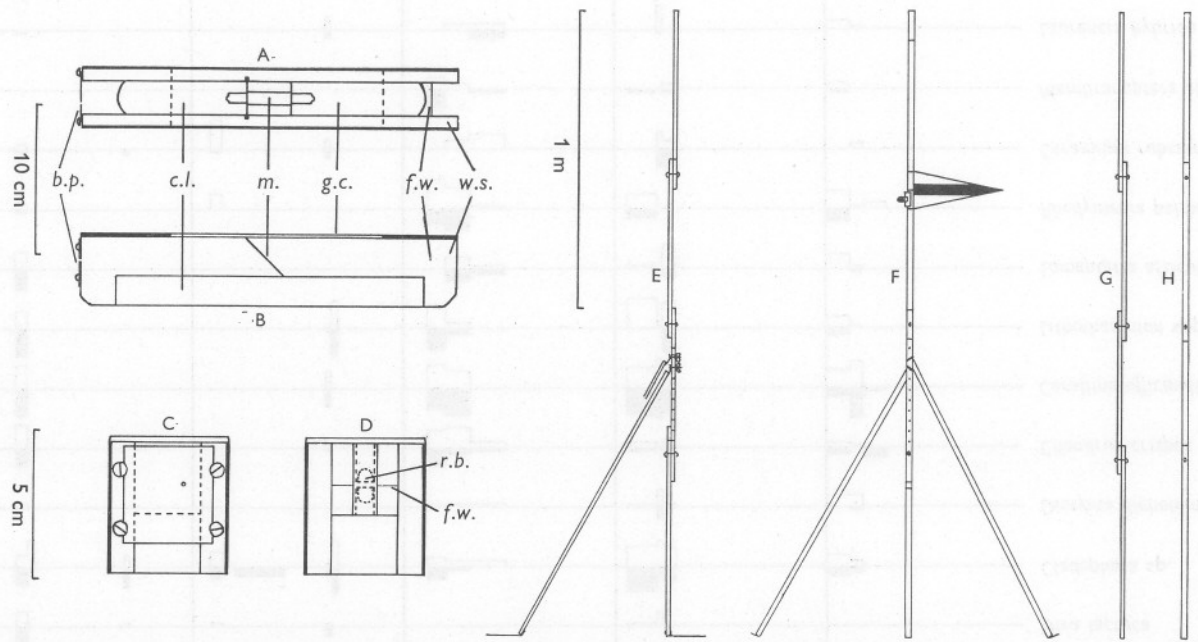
Diagrams of the sighting level (A-D), fixed staff (E and F) and movable staff (G and H). A, top view of level; B, side view; C, end view with brass plate in place; D, end view with plate removed; E, side view of fixed staff; F, front view; G, side view of movable staff; H, front view. *b.p.*, brass plate; *c.l.*, carpenter's level; *f.w.*, fine wire; *g.c.*, glass cover; *m.*, mirror; *r.b.*, reflexion of bubble; *w.s.* wooden sides.
